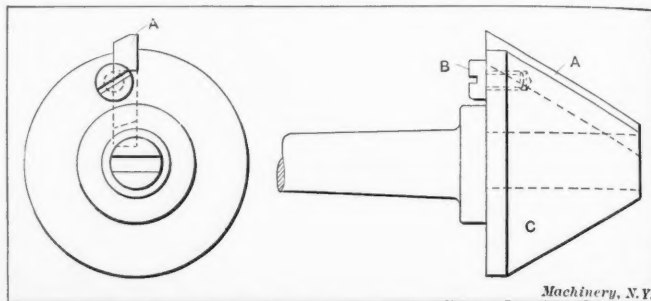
View showing Principle of Combined Centering Tool and Cone Center
